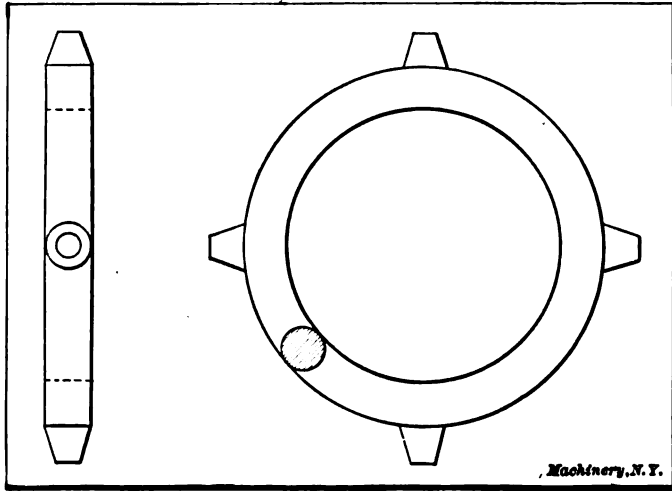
A Forging for which the Die Impression should be milled and typed before Turning
